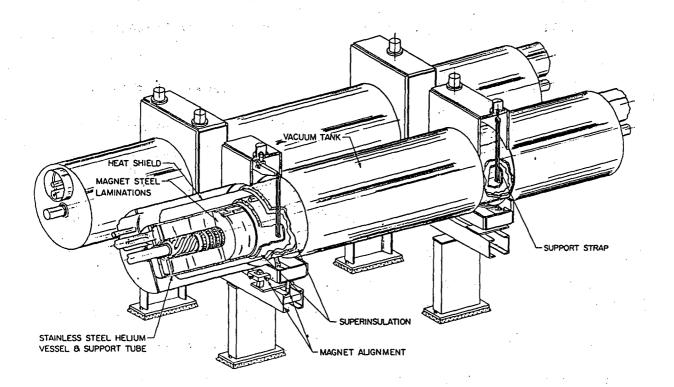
ISABELLE-CBA dual magnetic cold iron, warm bore.
